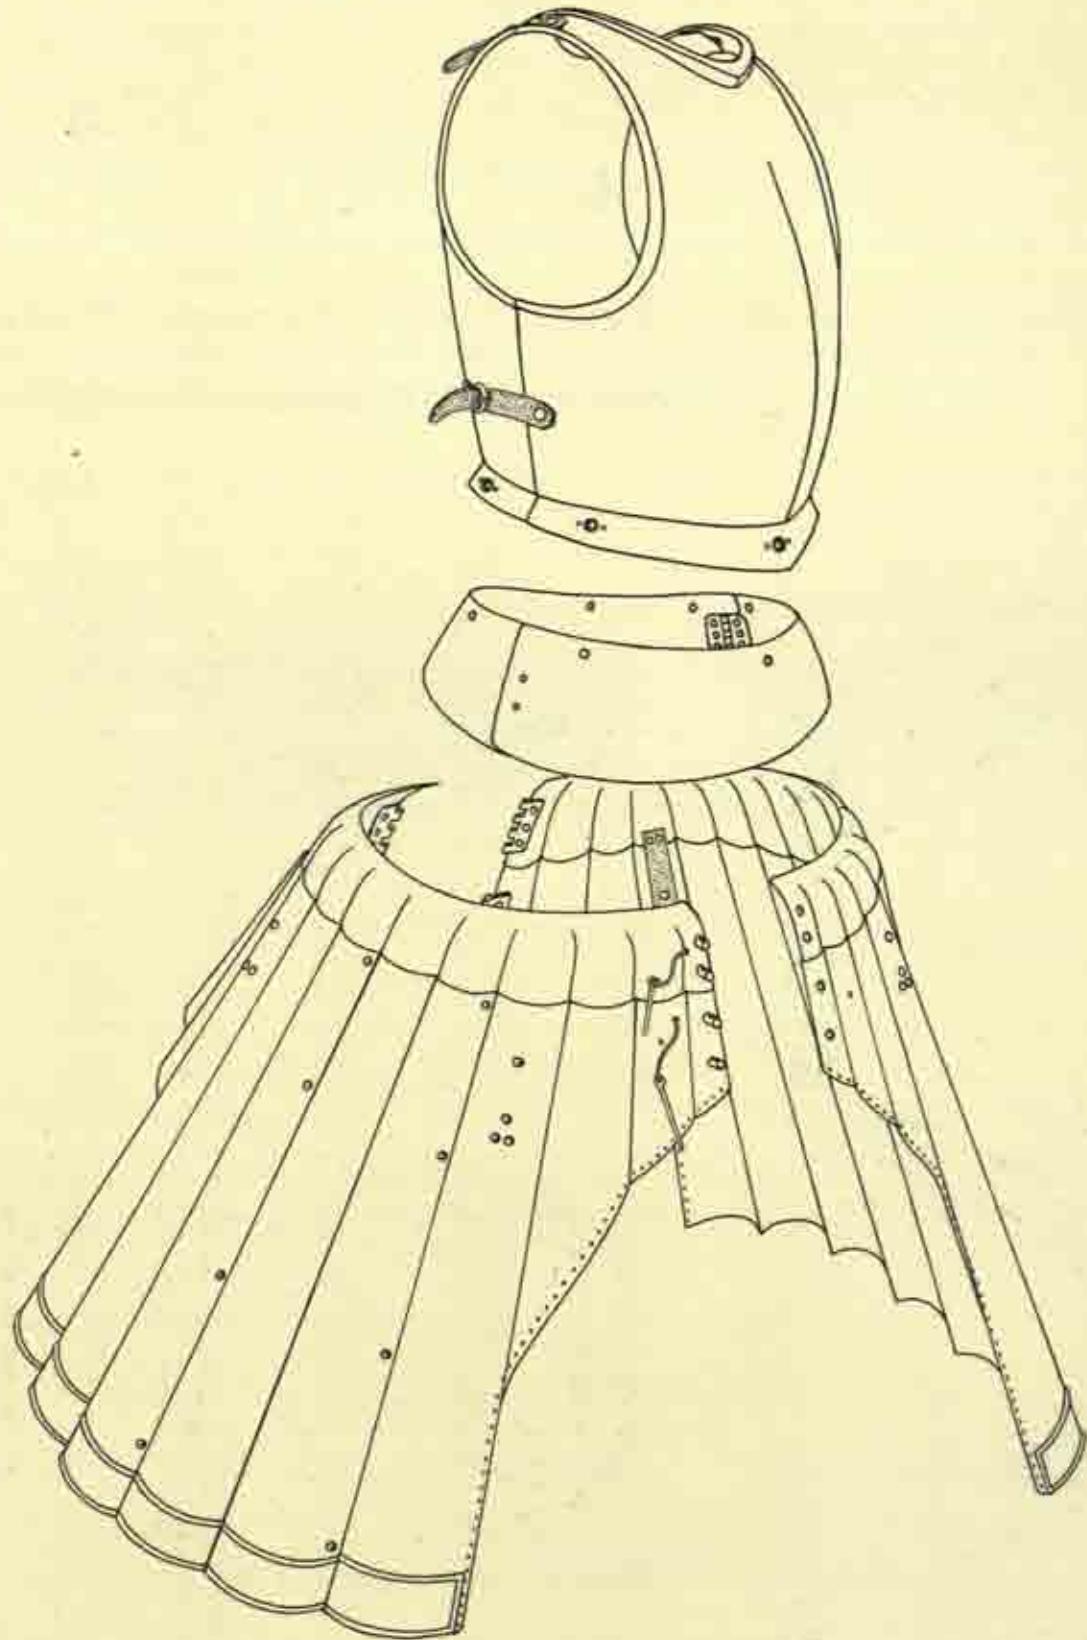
The Cuirass and Base. Exploded view to illustrate method of assembly.
